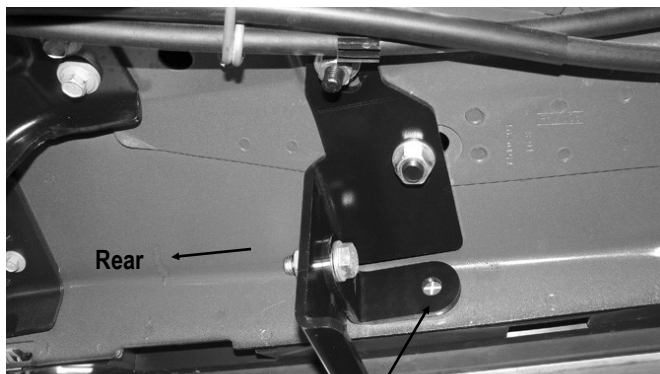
M8 Rivet Nut Installed on Pinch Weld (Driver Rear Support Bracket Location)
